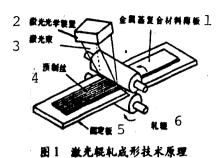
Principle of laser roll forming technique KEY; 1 - metal-based composite material thin plate 2 - laser optics apparatus 3 - laser beam
